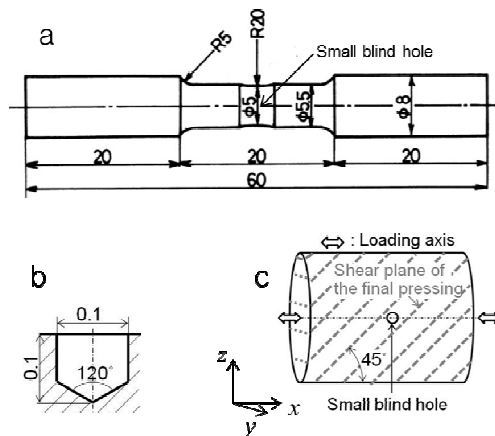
Details of fatigue smooth specimens: (a) Shape of the fatigue specimen; (b) Shape of a small blind hole; (c) drilling location of a small blind hole with respect to shear plane of the final ECAP pressing.
